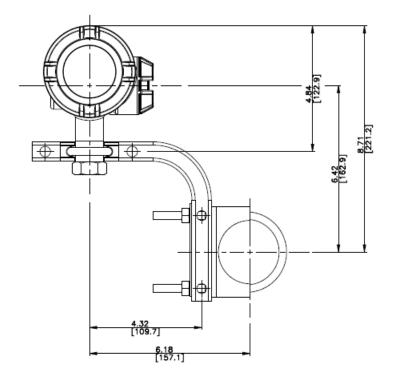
MOUNTING ASSEMBLY - DIMENSIONS ARE IN INCHES [MILLIMETERS]
